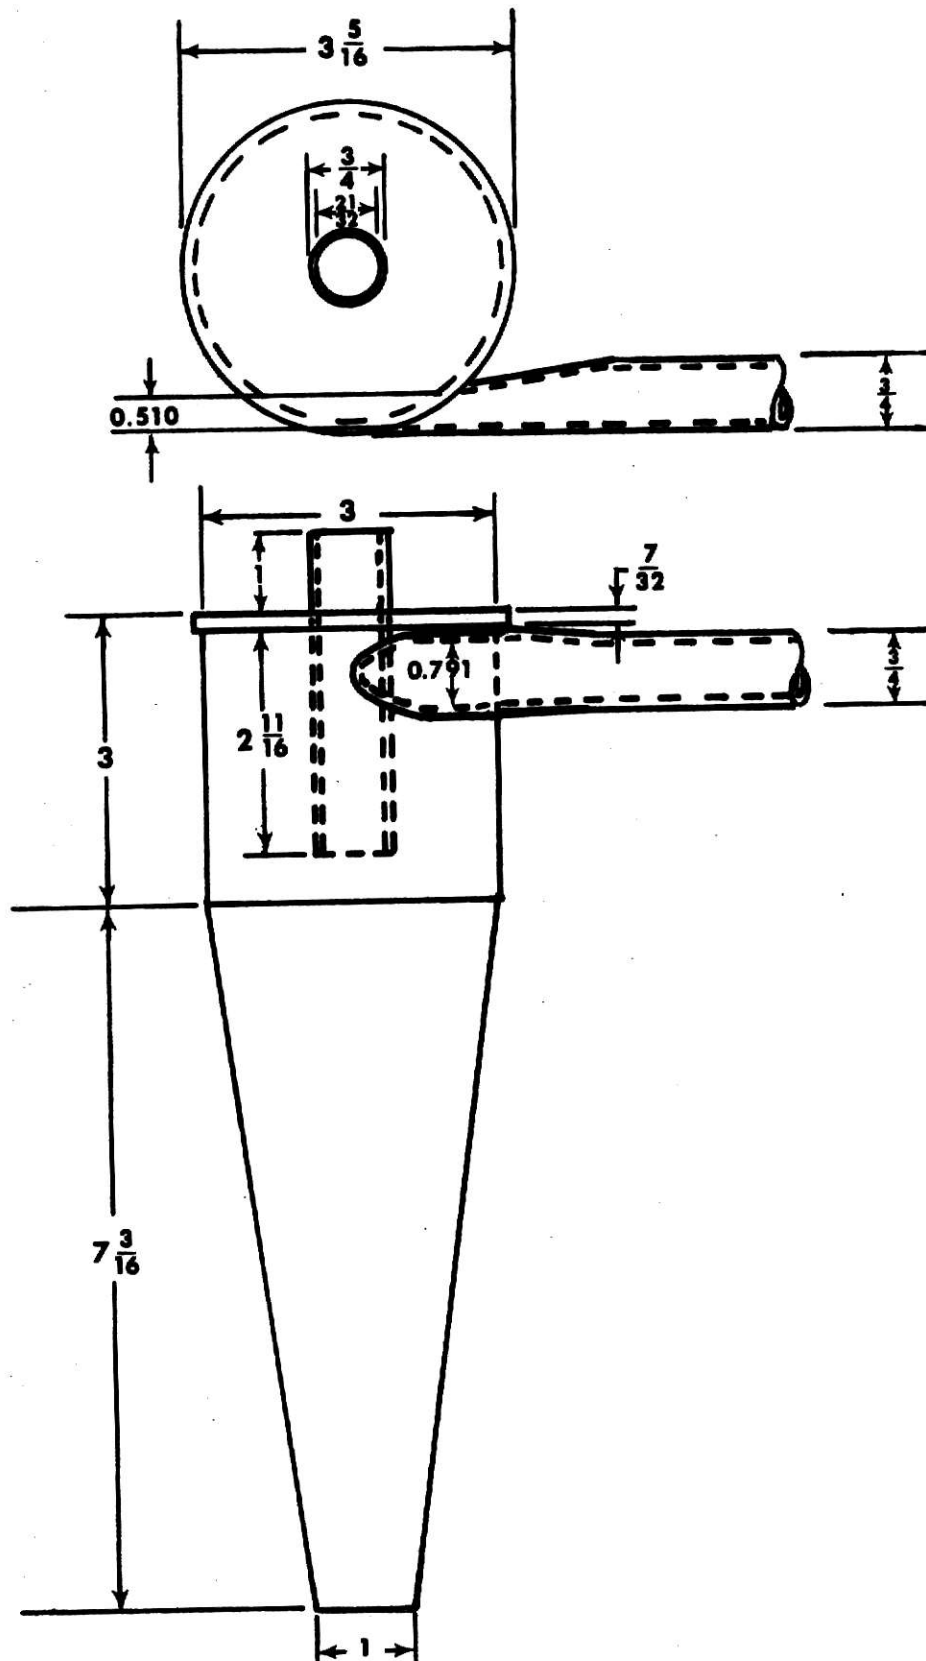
CYCLONE DIMENSIONS (IN INCHES)
